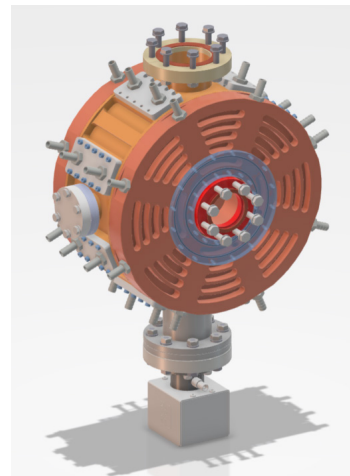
technical drawing of the buncher cavity; top, coupling port; bottom vacuum port with a combined NEG ionic pump.
